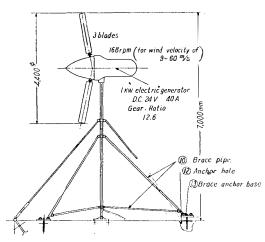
Wind-mill for 1KW electric generator (constructed & presented by Honda Giken Kogyo Co.).
